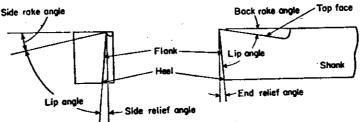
Tool nomenclature and tool angles (sec. 3.50 for tool signature)
